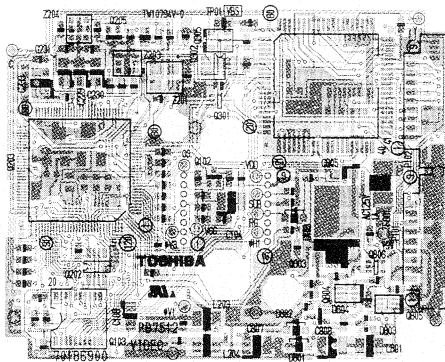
U501 Camera PC Board (Top Side)
